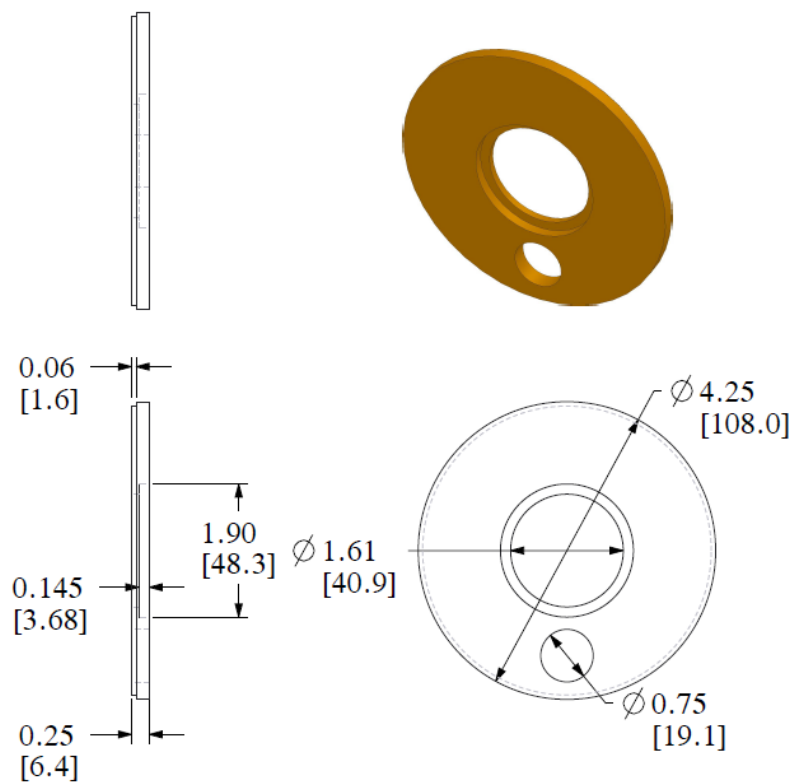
S-6. Dimensioned Drawing of the Back Plate
